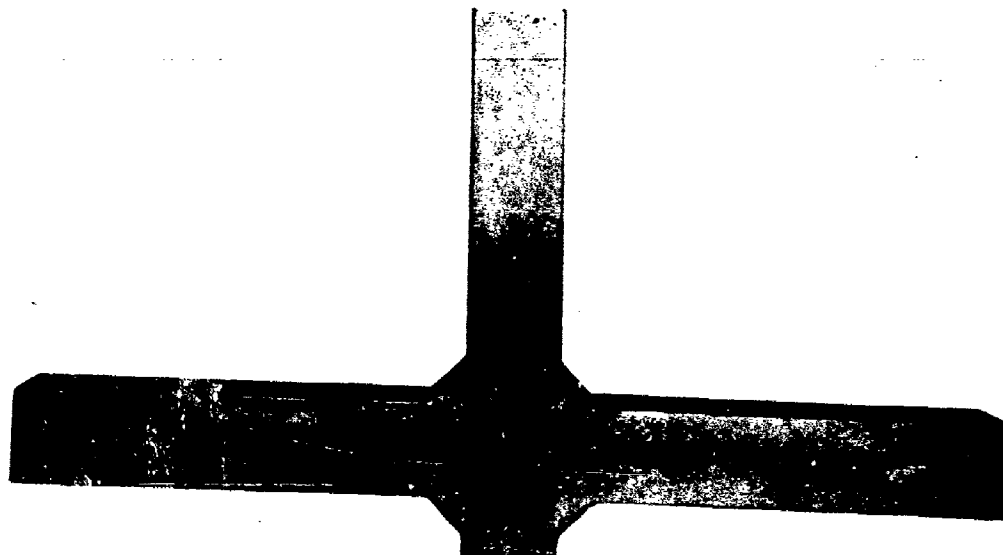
Cruciform of 7039 alloy showing crack which occurred on short transverse side of through plate. Neoprene-coated specimens were used to prevent failure on these surfaces
